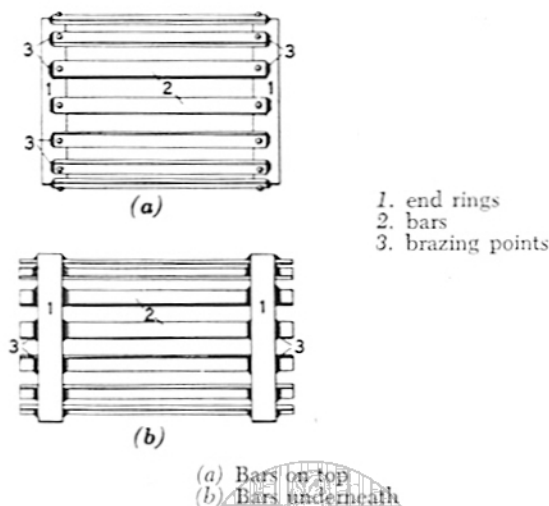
METHODS OF ATTACHING BARS TO RINGS
